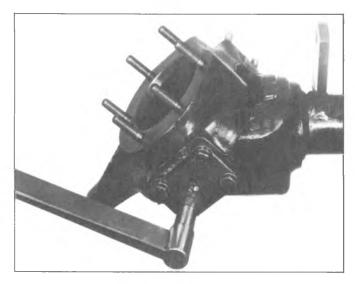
C-28K--Installing Lower Bearing Cap-and-King Pin
